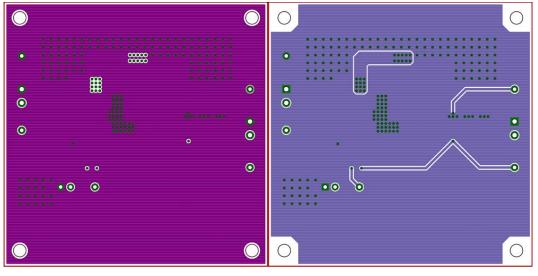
Example of PCB Layout (Silkscreen Overlay)
